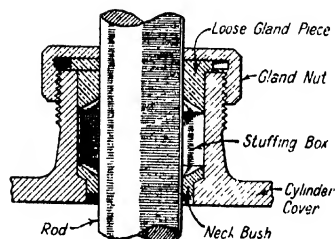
B.—GLAND WITH SCREWED NUT AND LOOSE GLAND PIECE
